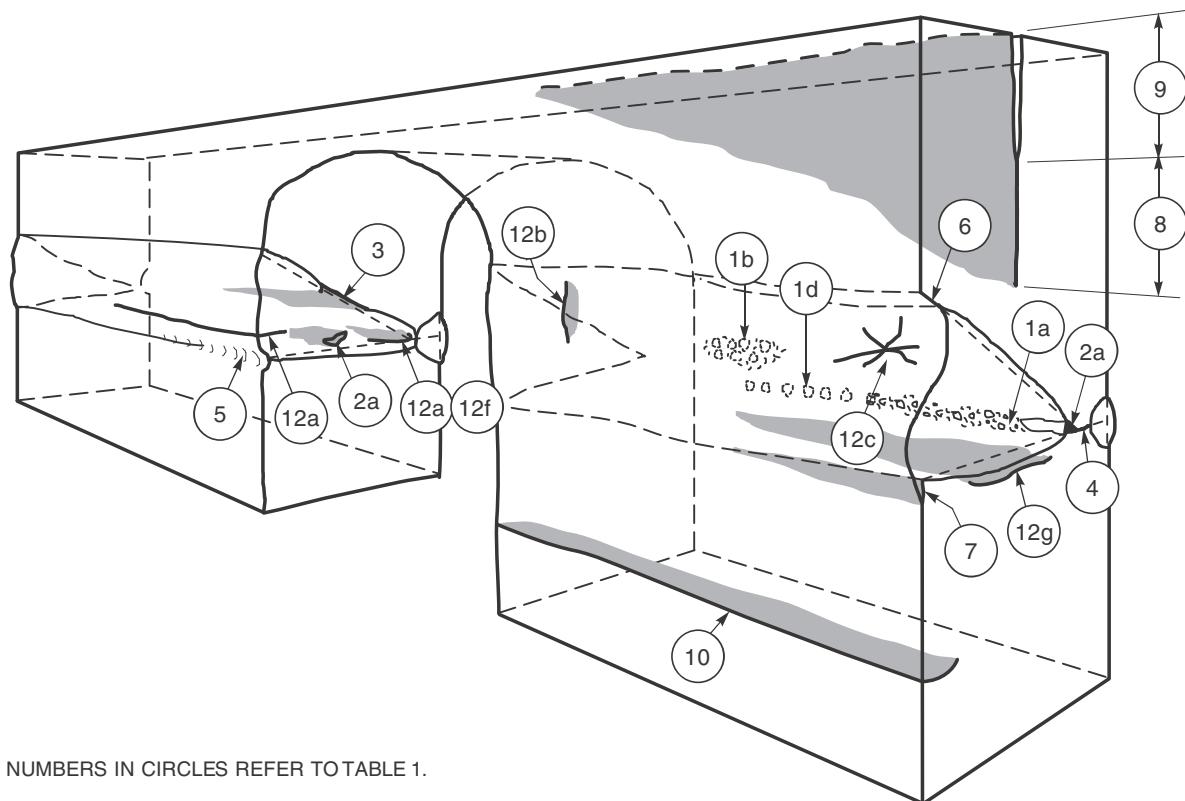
Single-Bevel-Groove Weld in Butt Joint
